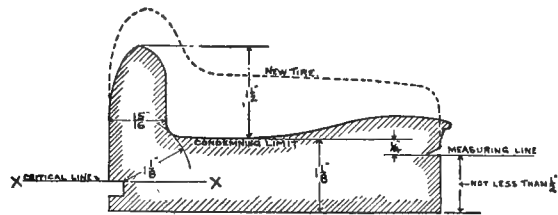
STEEL TIRE, RETAINING RING FASTENING.
